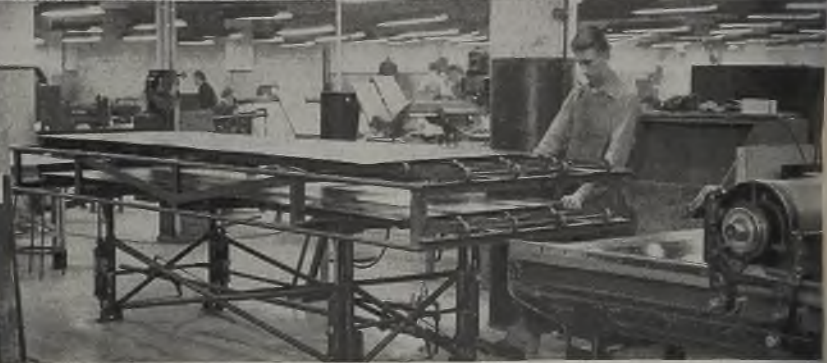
(Top)—This belt conveyor travels slowly enough that it can be used as a work-bench for deburring holes and edges of aluminum sheet skins which previously were drilled and routed. Finished pieces are removed at the end of the 70-foot long belt
